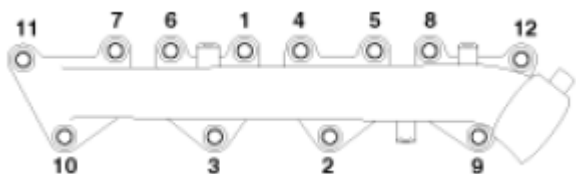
Identifying Exhaust Manifold Nuts Tightening Sequence (LH)- Without Engine Assembly Removal
